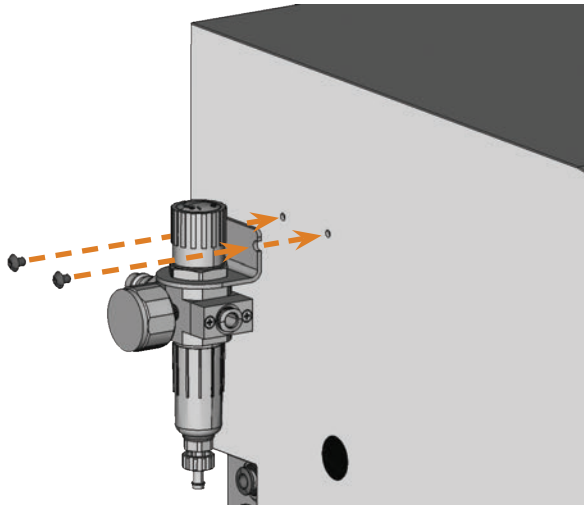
MOUNTING THE SERVICE UNIT ON THE MACHINE
